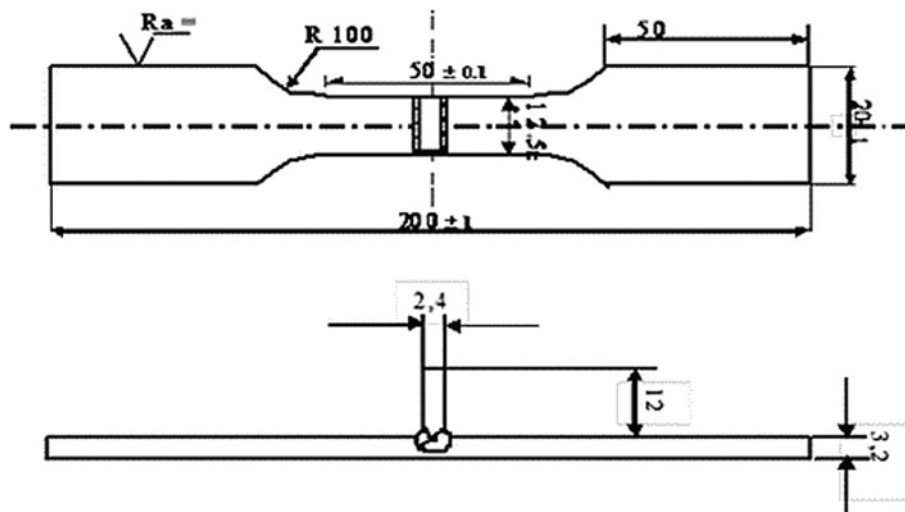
Hoop stress specimen (the dimension in millimeters)
